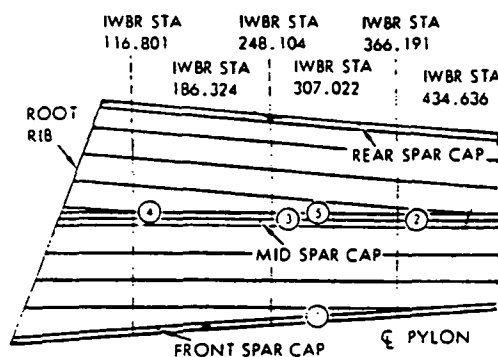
PLANFORM VIEW OF INNER WING BOX LOWER SURFACE PANEL ASSEMBLY - CORRELATION ANALYSIS POINTS
